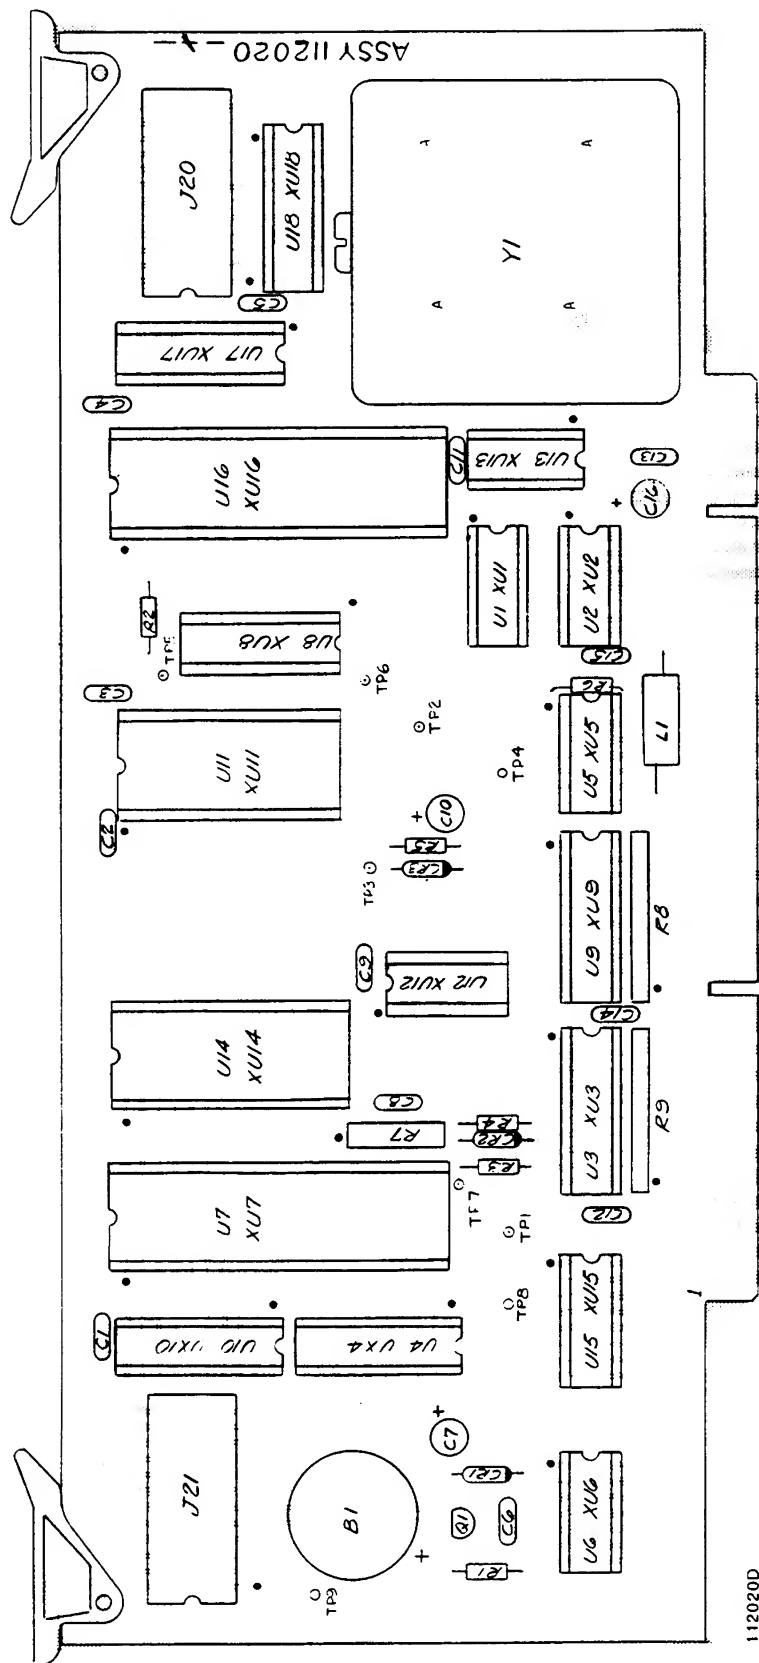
C.P.U. Board A5 Parts Location Diagram.
